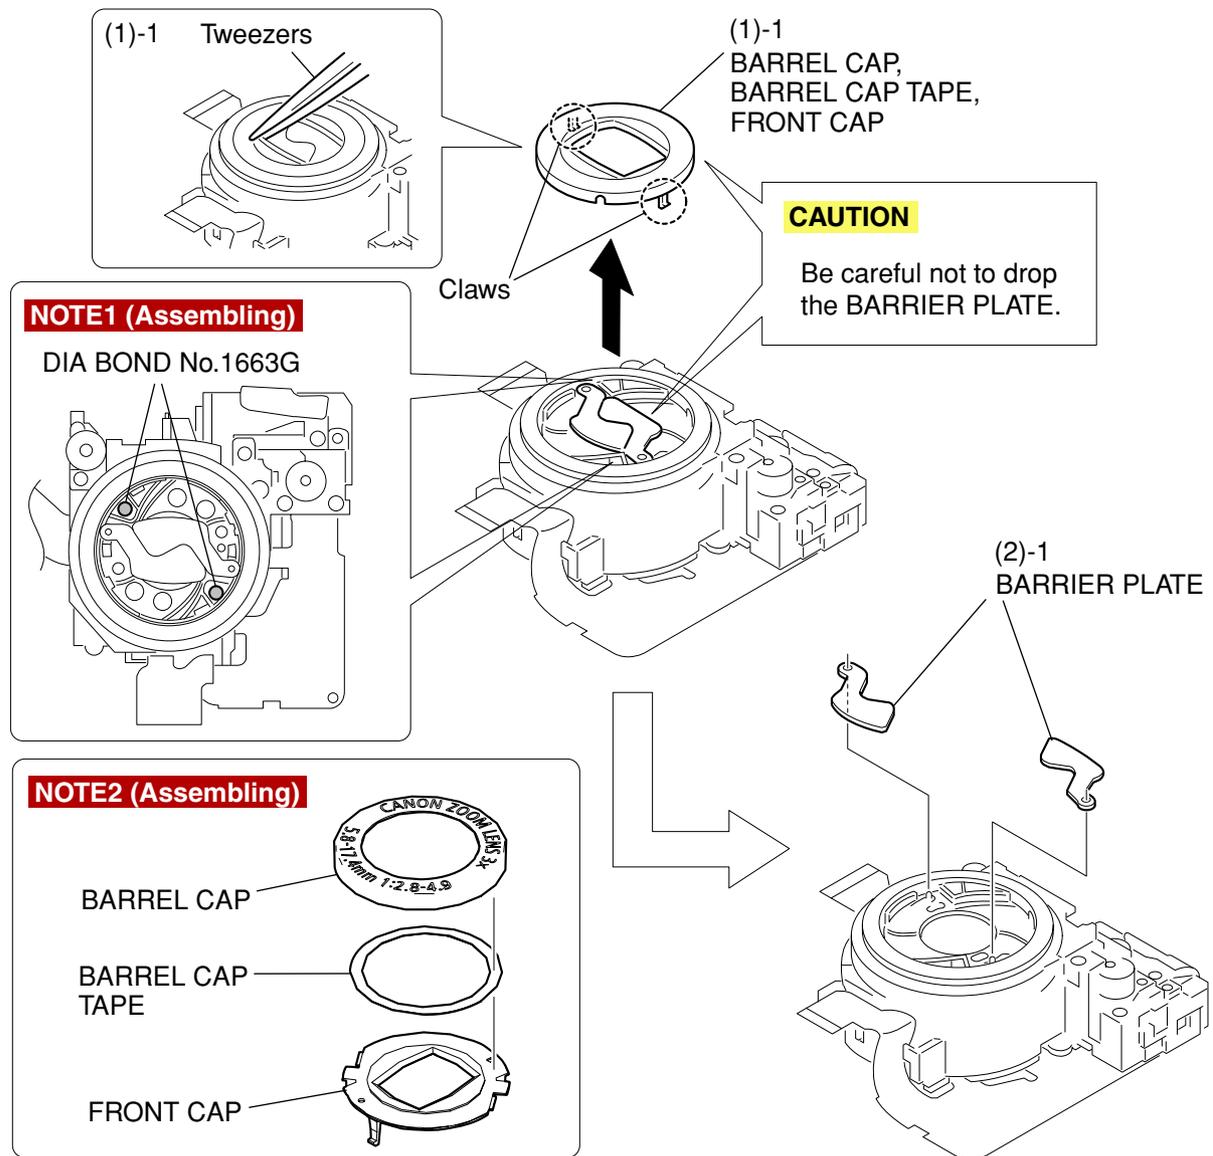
BARREL CAP, BARREL CAP TAPE, FRONT CAP, BARRIER PLATE
